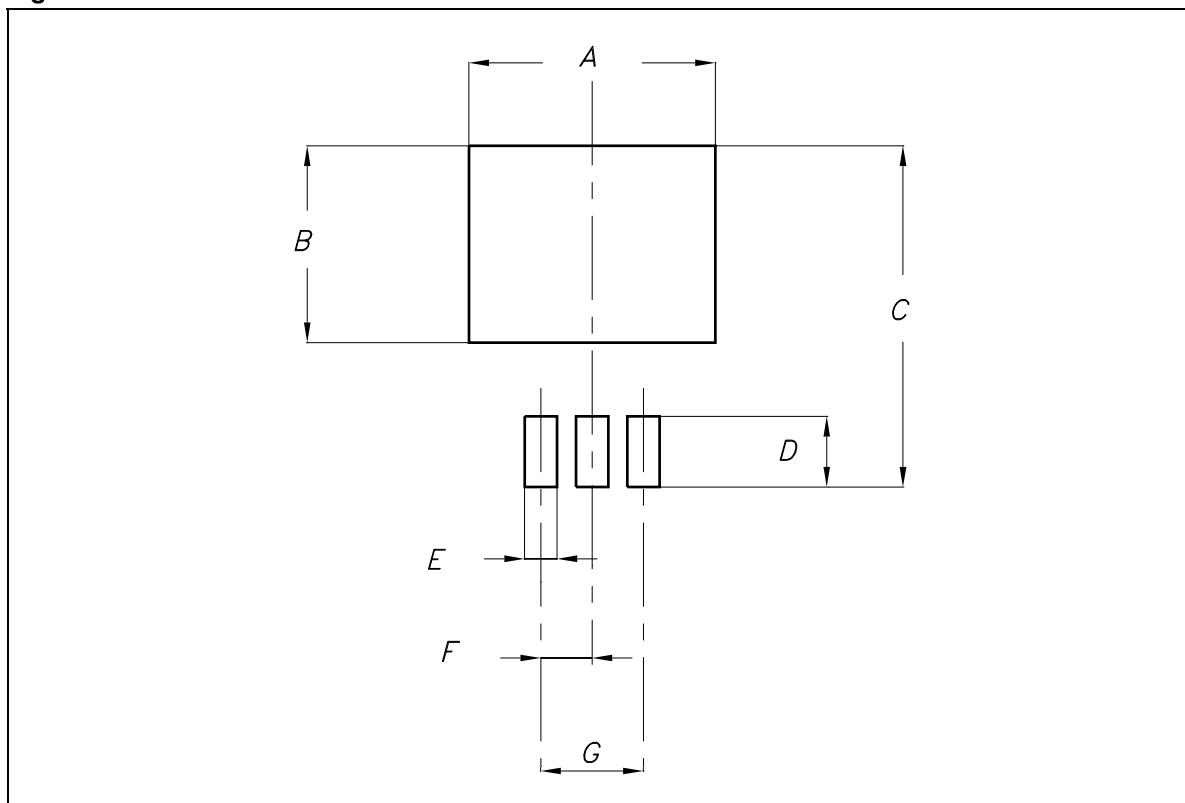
DRAWING DIMENSION D²PAK/A (TYPE WOOSEOK-SUBCON.)
